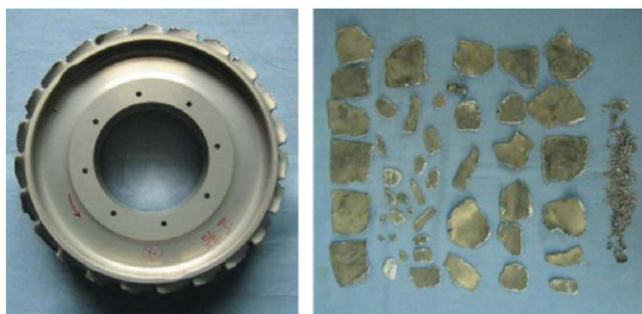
Debris of the first stage rotor and the first stage rotor blades [72].
